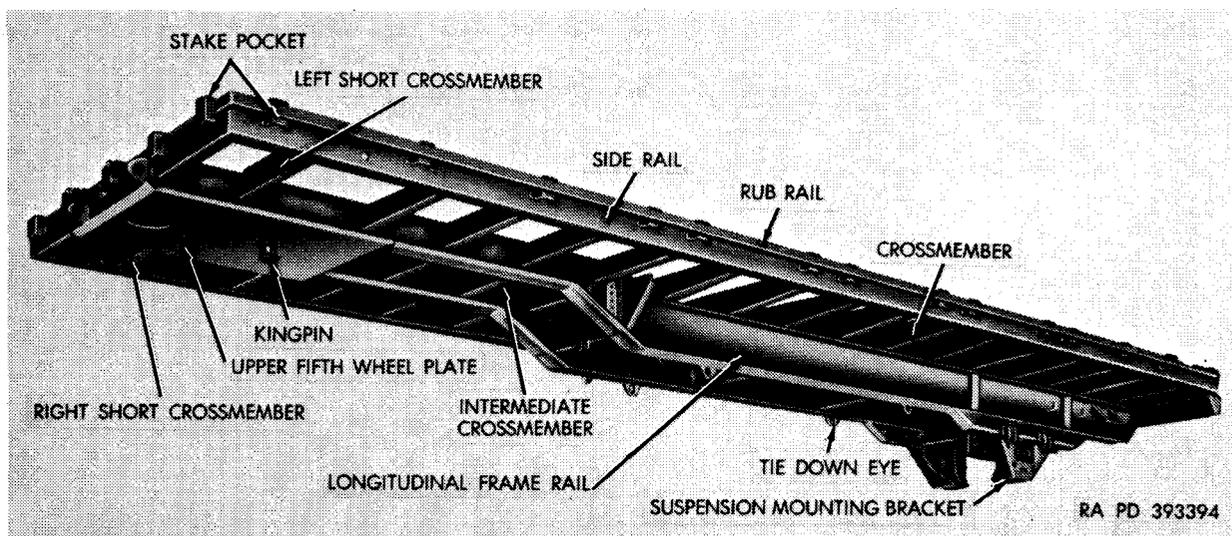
Location of tie-down eyes and chassis frame and body frame components (M127 chassis shown)
